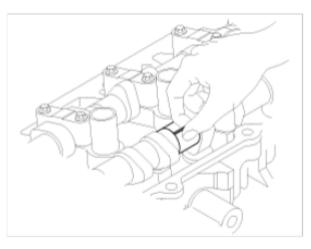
Inspecting Camshaft Journal Clearance Courtesy of HYUNDAI MOTOR AMERICA
